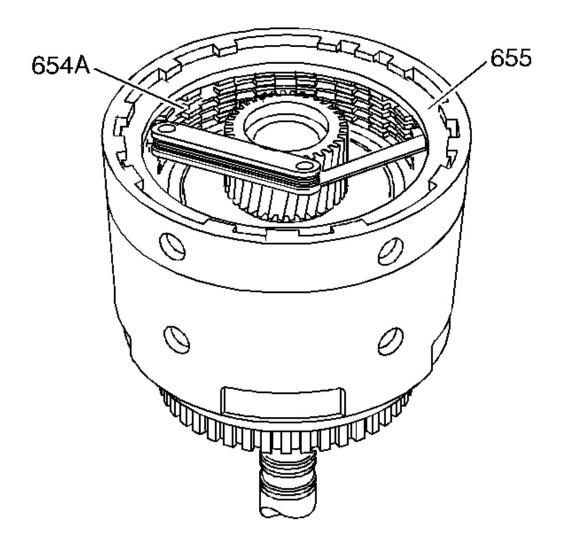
Checking 3rd & 4th Clutch Plate Travel Courtesy of GENERAL MOTORS CORP.
